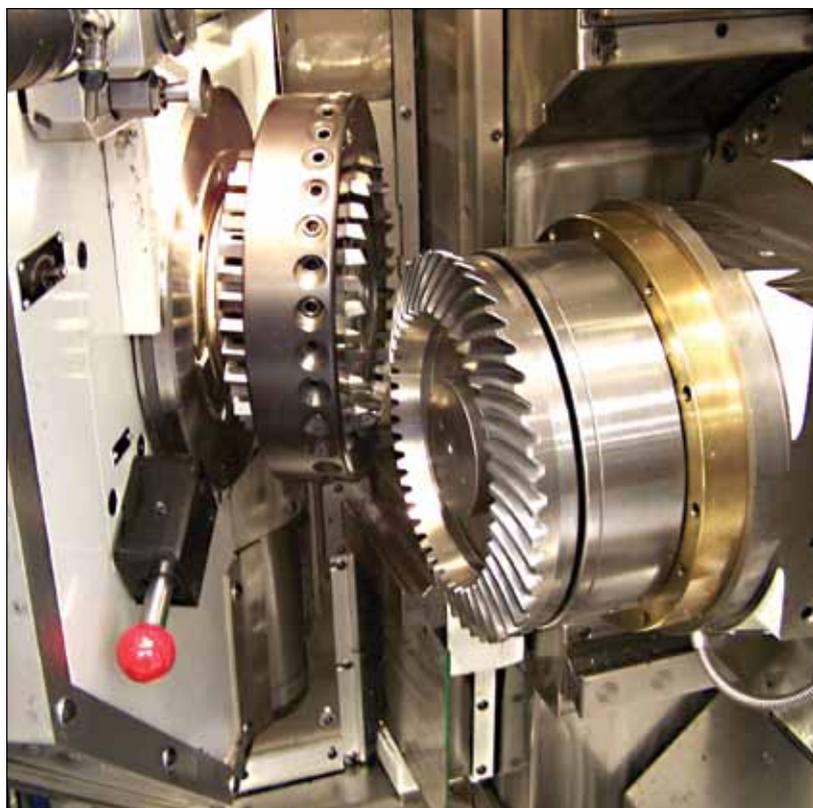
Spiral bevel gear cutting with face hobbing cutter (continuous process).
